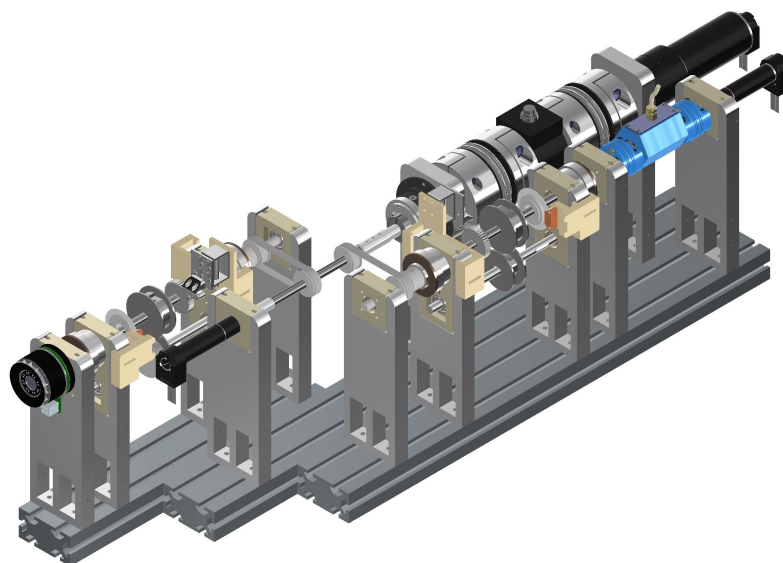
Panoramic view of the complete test bench, which contains both constant torque units and the variable torque unit with output. In this setup, one of the constant torque units is turned such that both can deliver positive torque.
